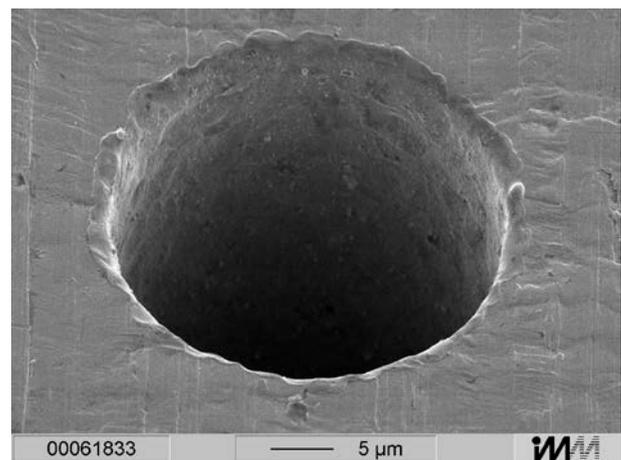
A hole only 20 µm in diameter produced with a die-sinking EDM machine equipped with a vibratory drilling spindle (Figure: ICT-IMM)
